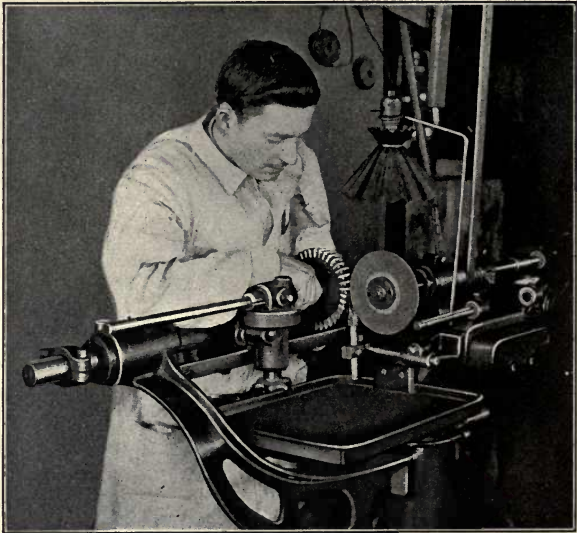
Sharpening the peripheral teeth of a milling cutter on an unguarded wheel.
